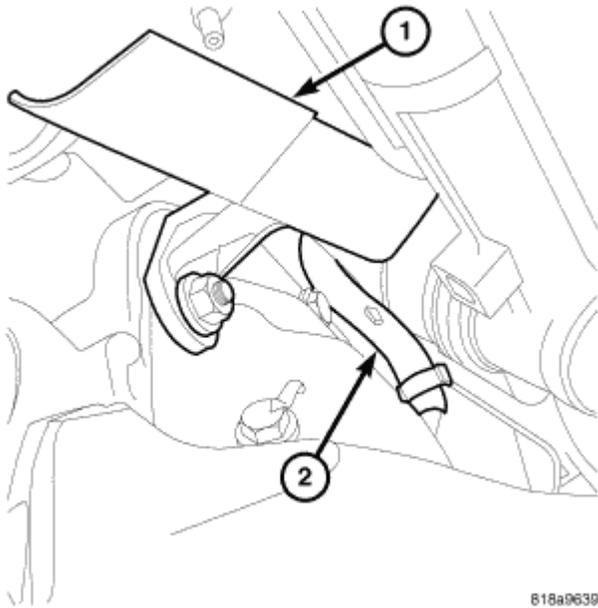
Identifying Oil Filter Drain Tray & Vent Hose
